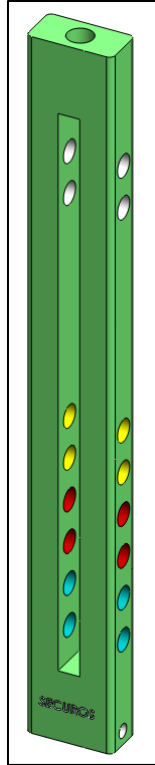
DOUBLE ROD AIMING GUIDE.
